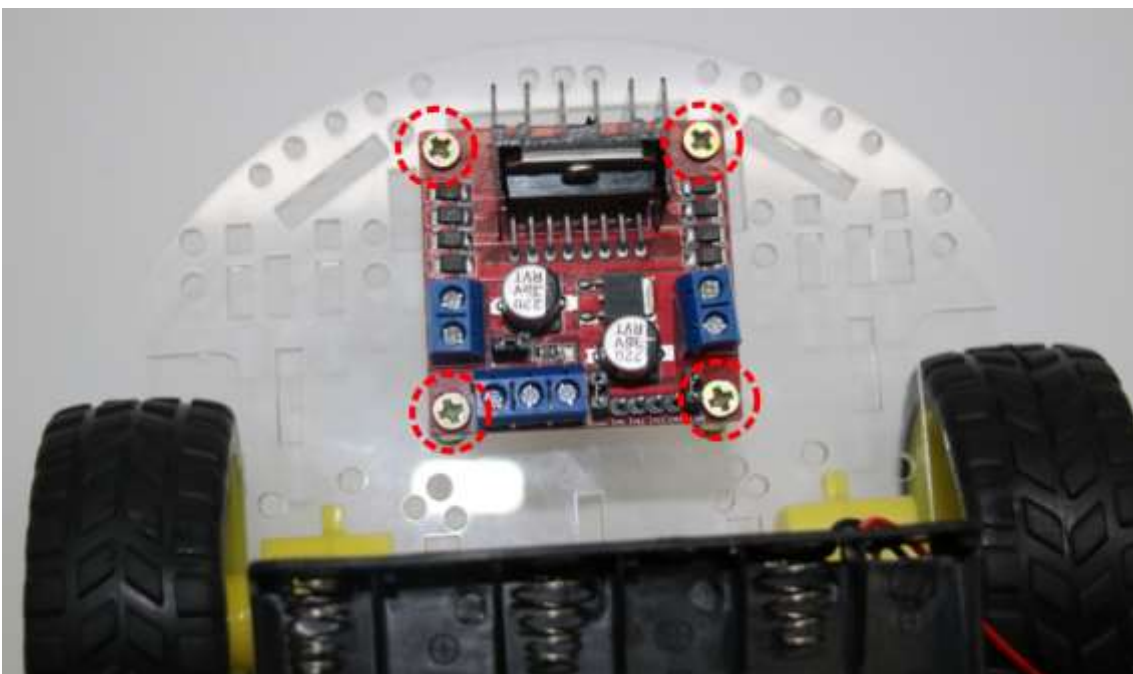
1 : Pieces that we will use to fix the control circuit of motors
